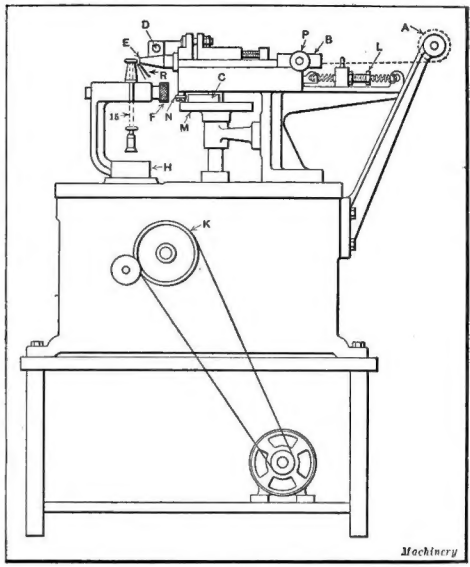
Machine used for inserting Hook End of Nickel Wires
